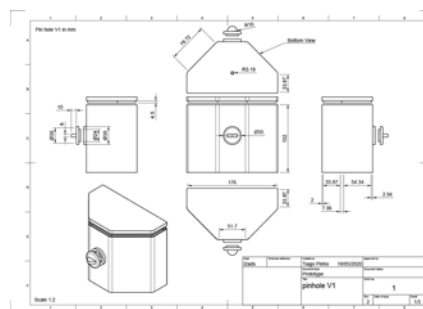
Technical drawing of the pinhole V1 model in Fusion 360.
